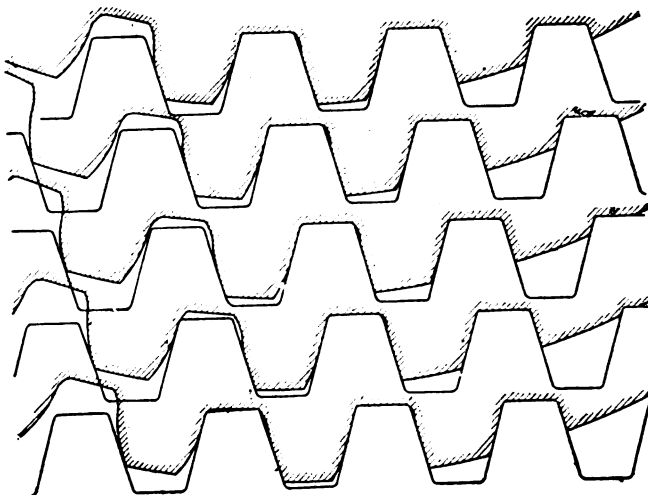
OUTLINE OF TOOTH FORM PRODUCED BY HOBBING
